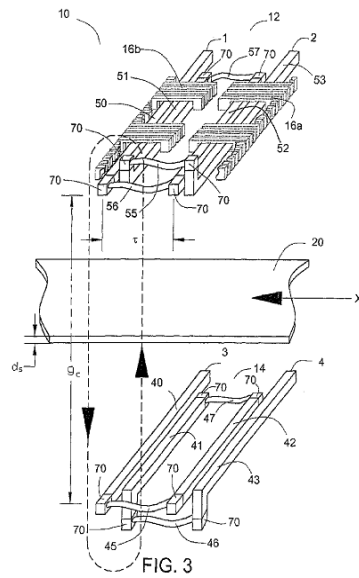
Exploded perspective view of moving pitch apparatus
